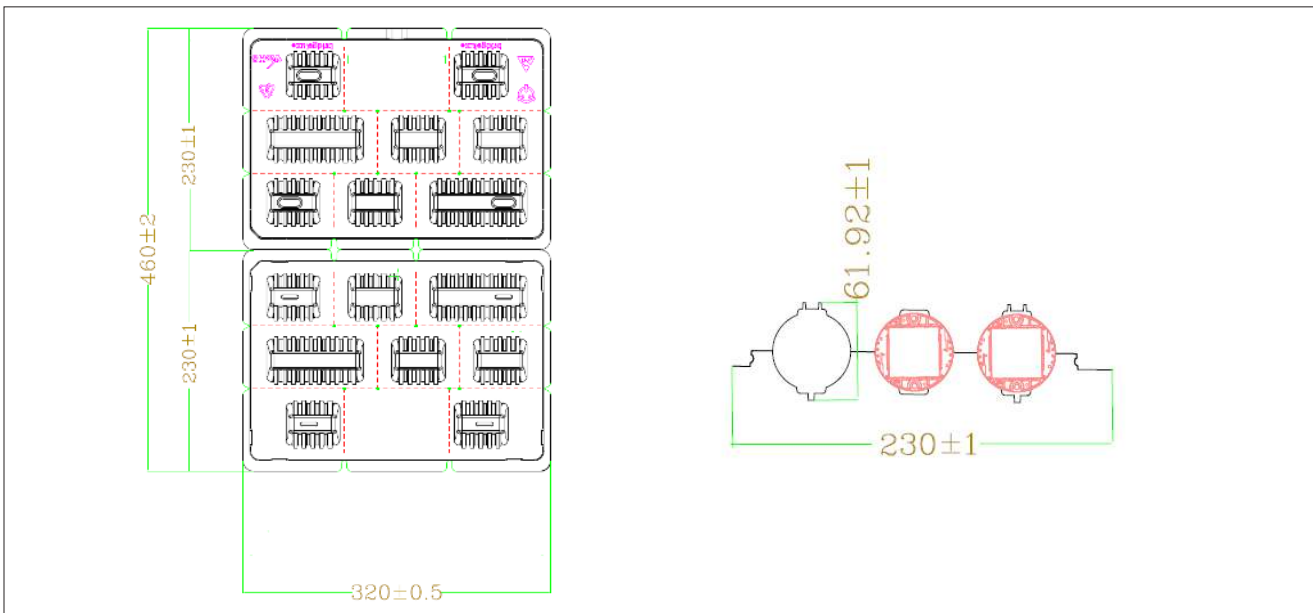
Drawing for Vero SE 18 Packaging Tray
